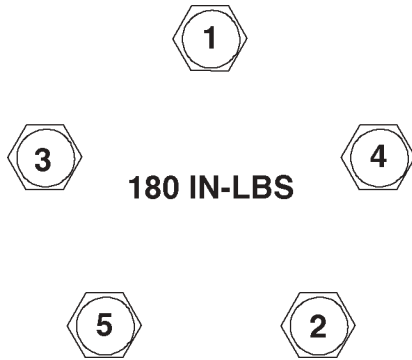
BEARING HOUSING TORQUE SEQUENCE
